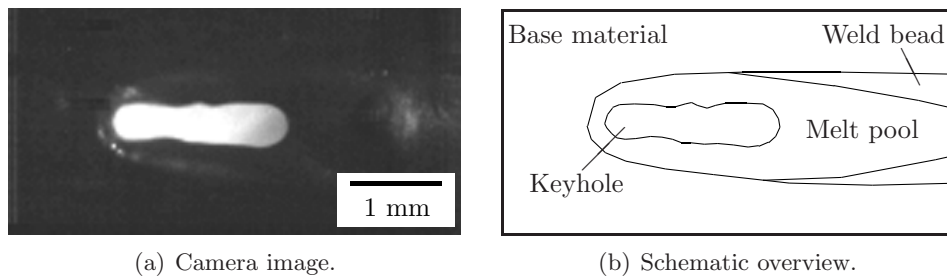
Camera image of the laser welding process, with an elongated keyhole.
